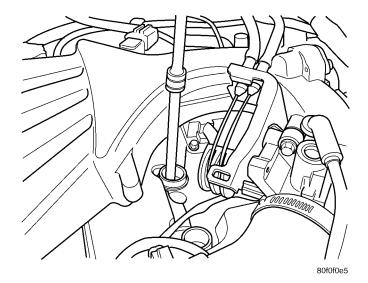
SPARK PLUG REMOVAL/INSTALLATION - 2.4L TURBO
